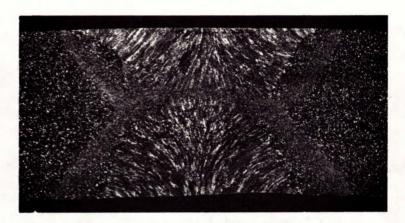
From weld specimen MR10. Submerged arc process, F72 electrode, EH14 flux, flat position.
